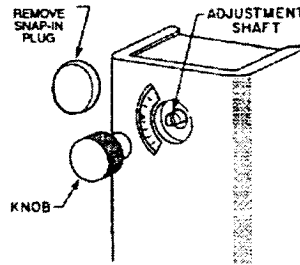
Drawing showing snap-in plug removed and the knob in line to assemble. Press the knob onto the slotted shaft.
